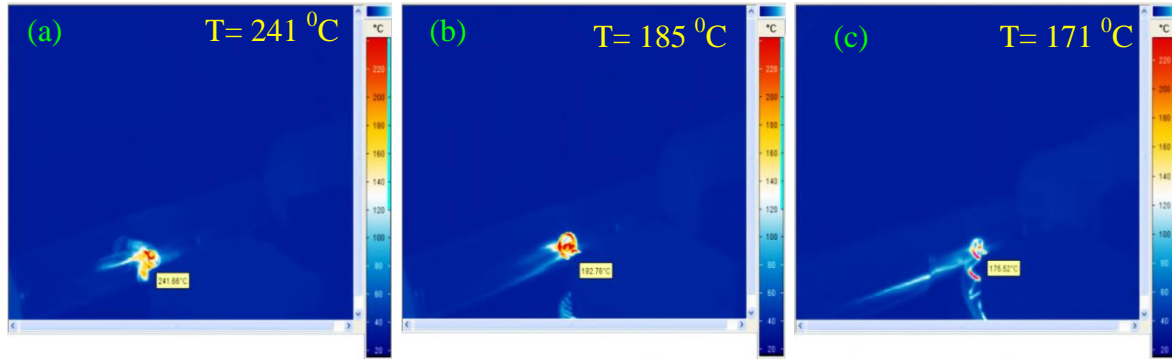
Thermal micrographs during machining with (a) un-textured cutting tool, (b) mechanical micro-textured cutting tool and (c) coated mechanical micro-textured cutting tool
